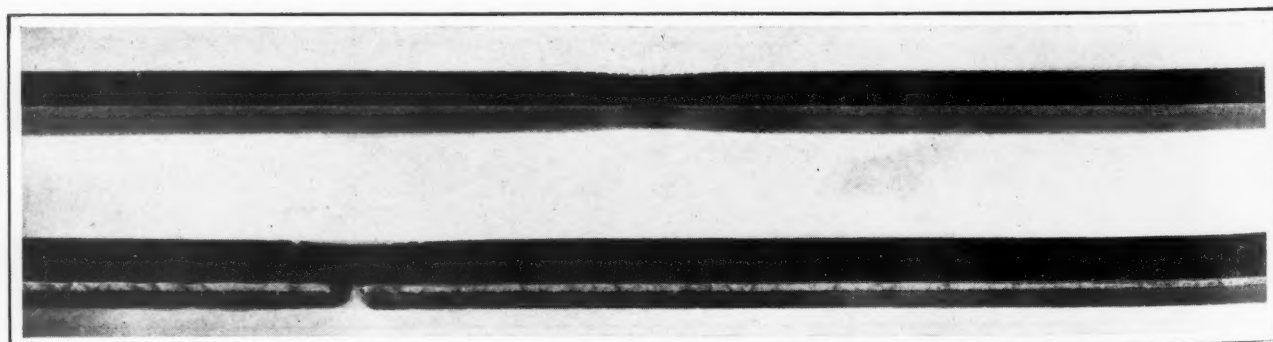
Upper Specimen Having Machined Edges Withstood Tensile Test Better than Lower Specimen Having Sheared Edges
